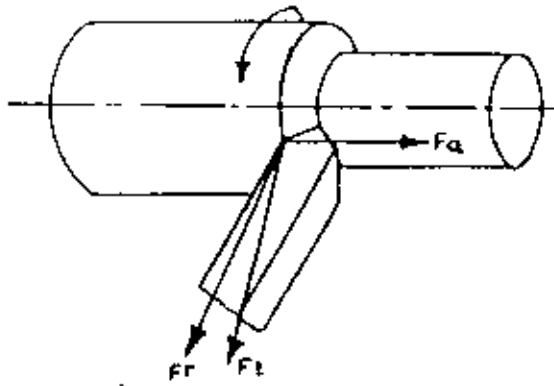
Components of the cutting forces during turning operation on lathe machine.
